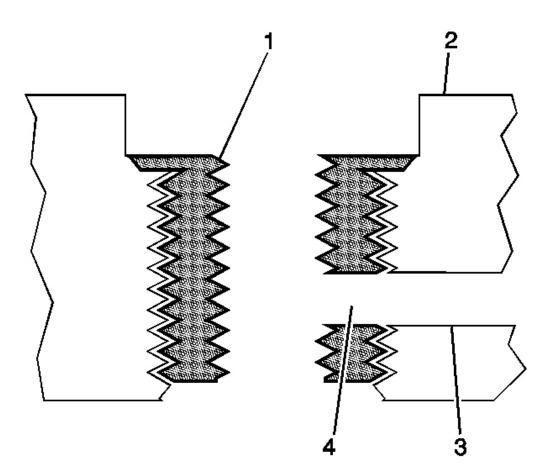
Inspecting Insert For Proper Installation - Recessed Thread Courtesy of GENERAL MOTORS CORP.
